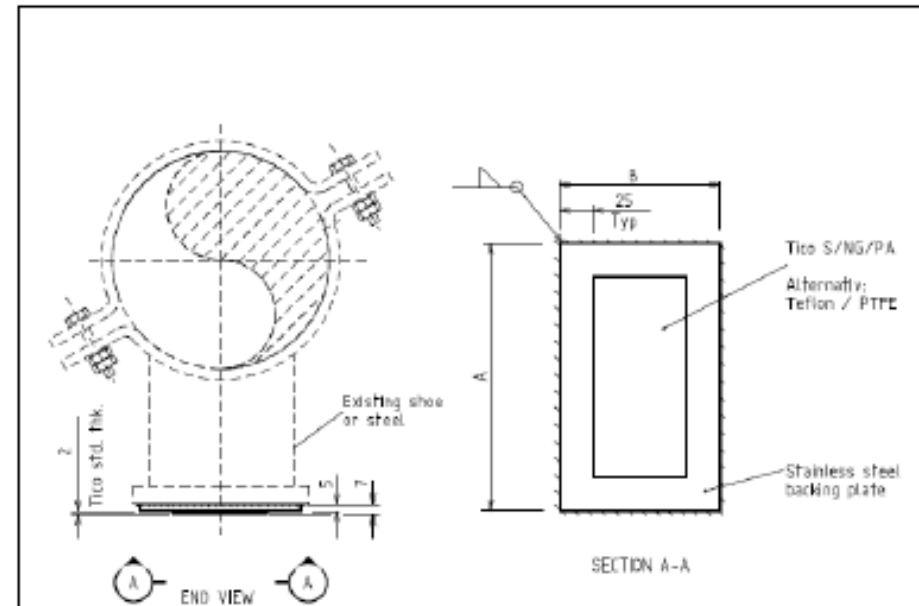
View Showing Arrangement of Slide Bearing Units
